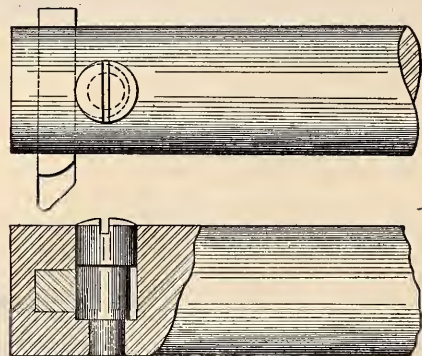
TOOL BAR FOR BORING TOOL HOLDER.
